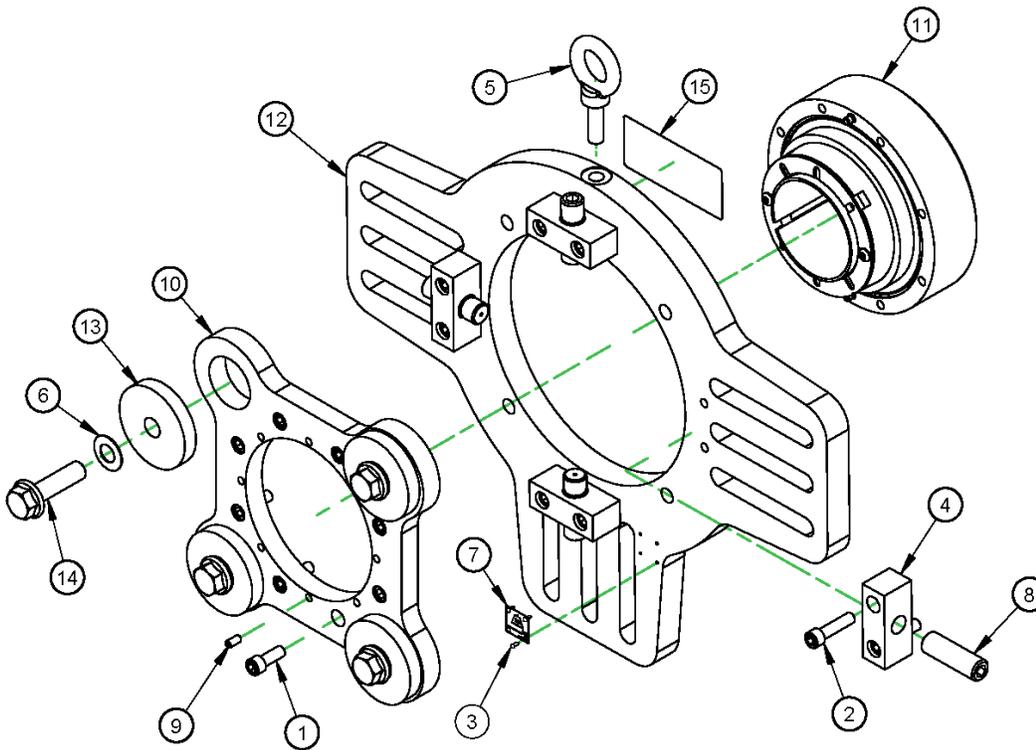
OD MOUNT BEARING ASSEMBLY AND HOUSING (P/N 53691)
